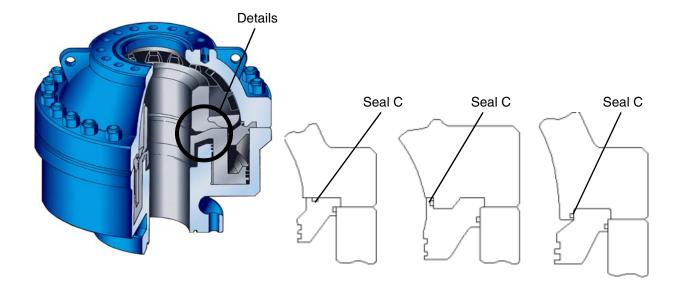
Bolted-Cover Upper Housing and Adapter Ring Configurations
